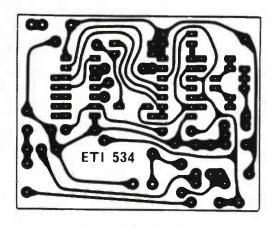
Printed circuit board layout. Full size 64 x 52 mm.
